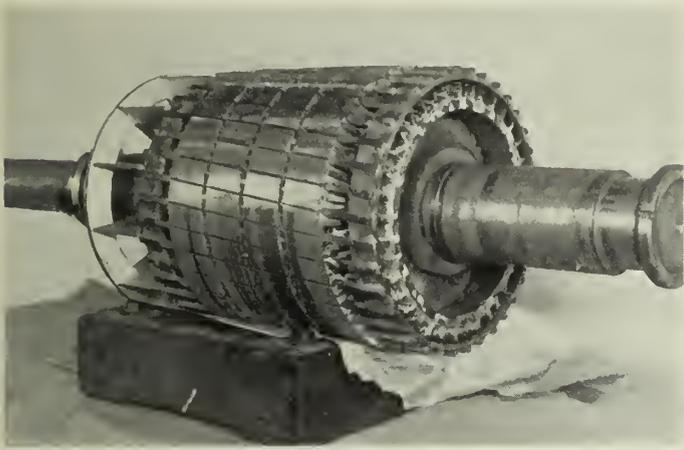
Double Cage Rotor for 75 h.p. Motor Fan Removed to show both Squirrel Cage Windings.
